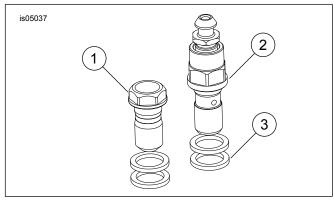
Service Parts: Chrome Banjo Bolt Kit
